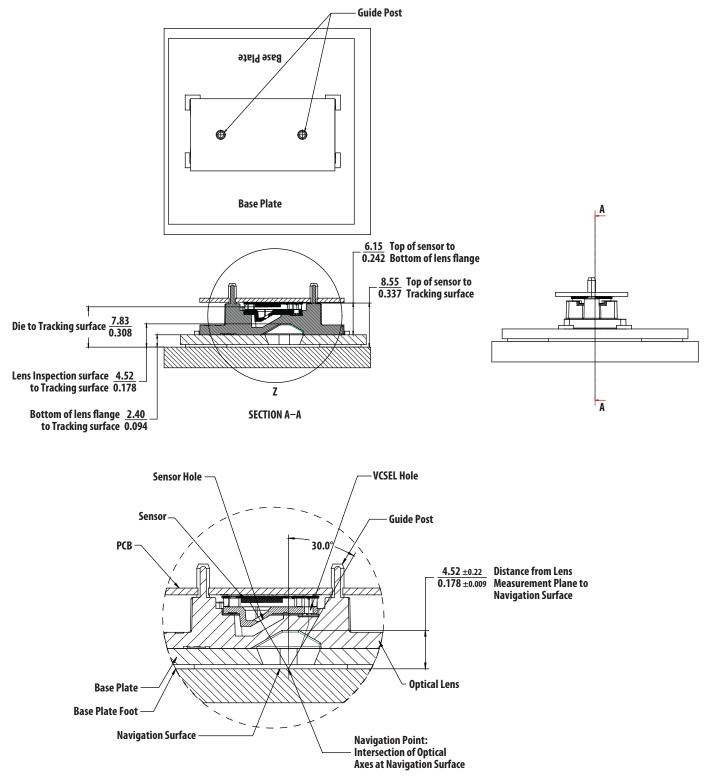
2D assembly drawing of ADNS-7630 sensor coupled with ADNS-7100-001 lens, PCB & base plate
